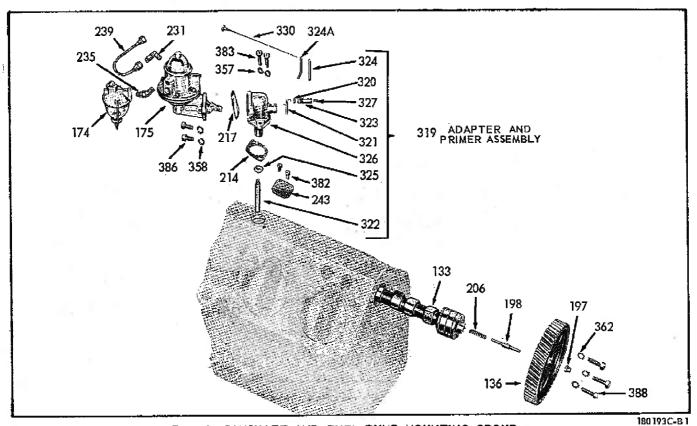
, CAMSHAFT AND FUEL PUMP MOUNTING GROUP
